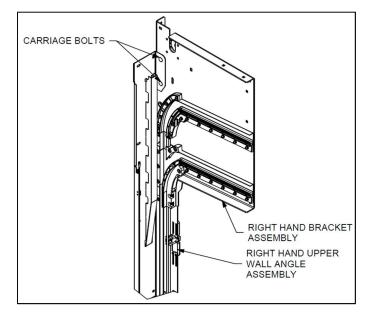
RIGHT-HAND BRACKET ASSEMBLY MOUNTED TO UPPER WALL ANGLE ASSEMBLY
